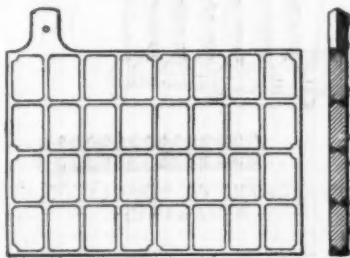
PLAN AND SECTION GADOT PLATE.
